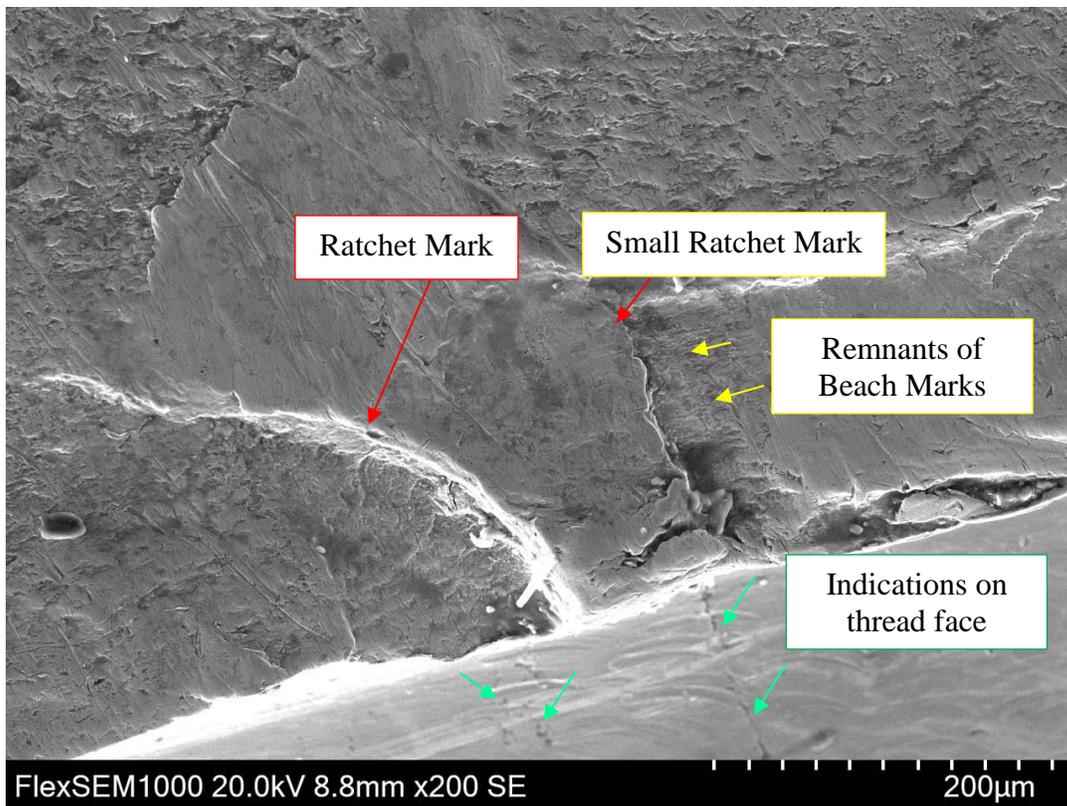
CLOSE VIEW OF THE RATCHET MARKS, BOLT C2
